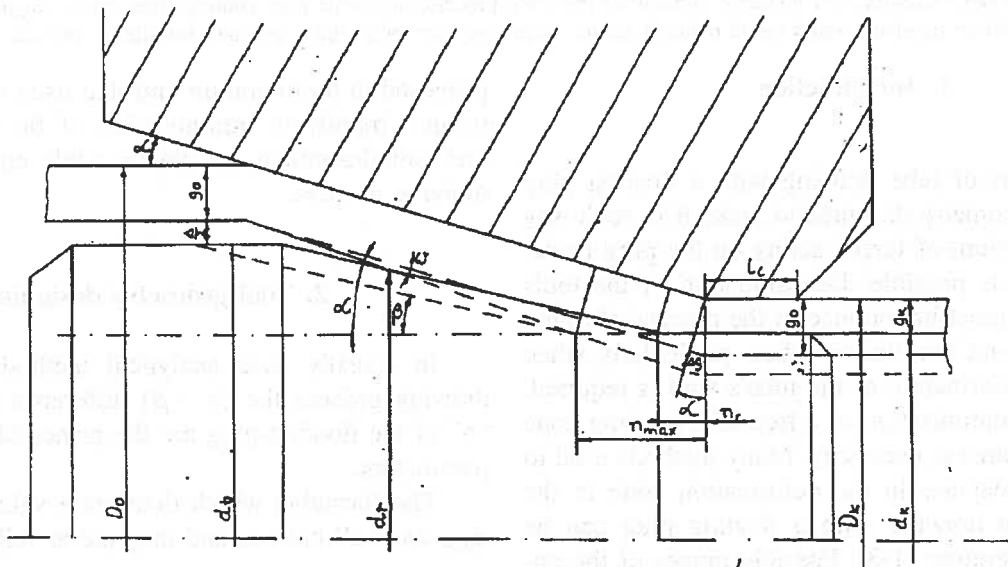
A schematic of tube drawing with a floating plug including the deformed tube metal flow in the direction of geometrical centre of a drawing die [4]
